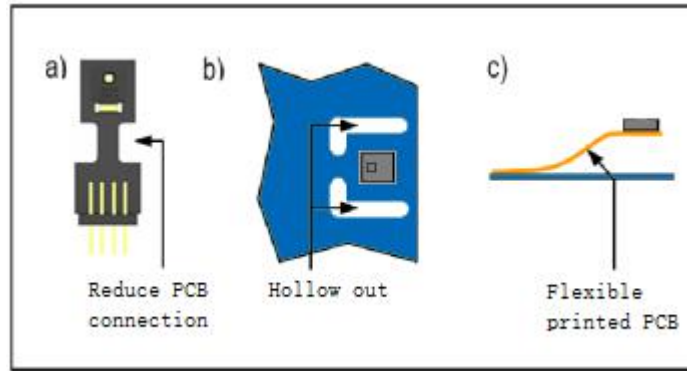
The sensor can be separated from the PCB with heat by reducing the PCB connection, hollowing out the place where there is no wire connection, or using a flexible printed PCB.
